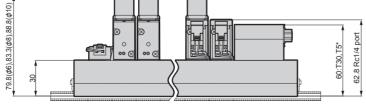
Refer to page 30 for detailed dimensions of the wiring block.
